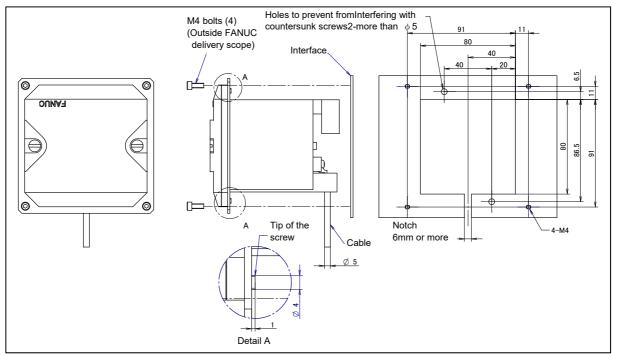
(c) Dimensions for remote battery box installation
